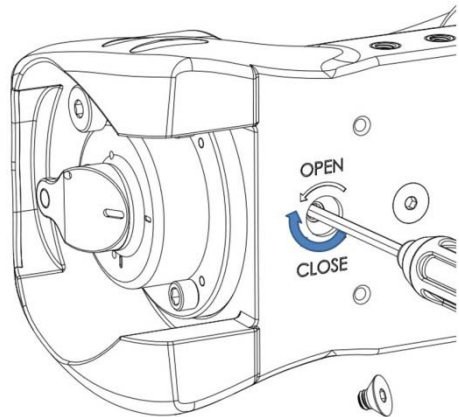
Exposure device with outlet port assemblies removed.
